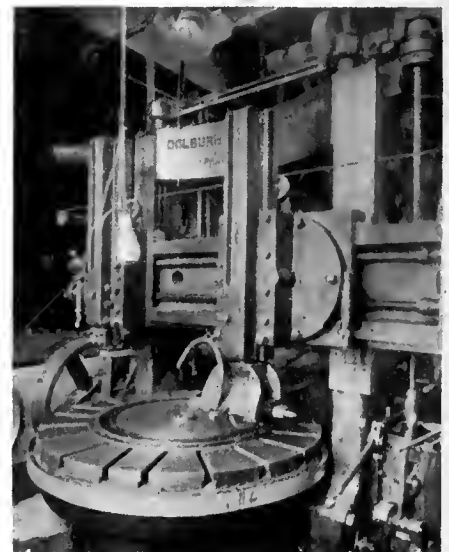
GRINDING THE RACEWAYS ON A 54-IN. BORING MILL.
